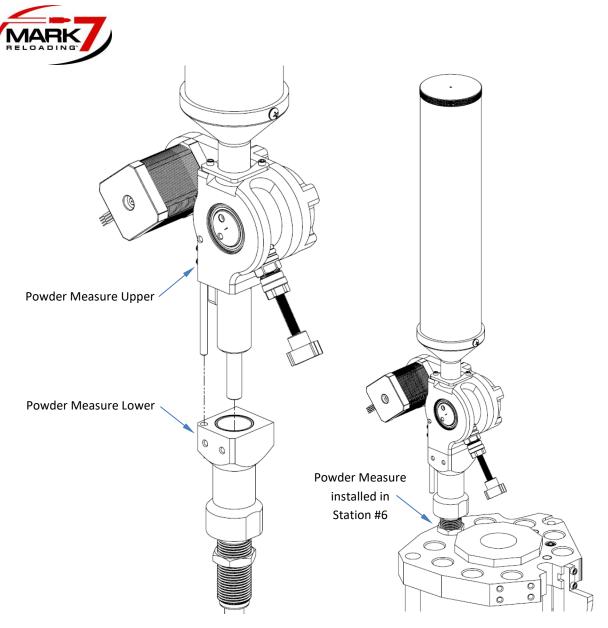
Powder Measure Upper and Lower Assembly Installation on Tool Head
